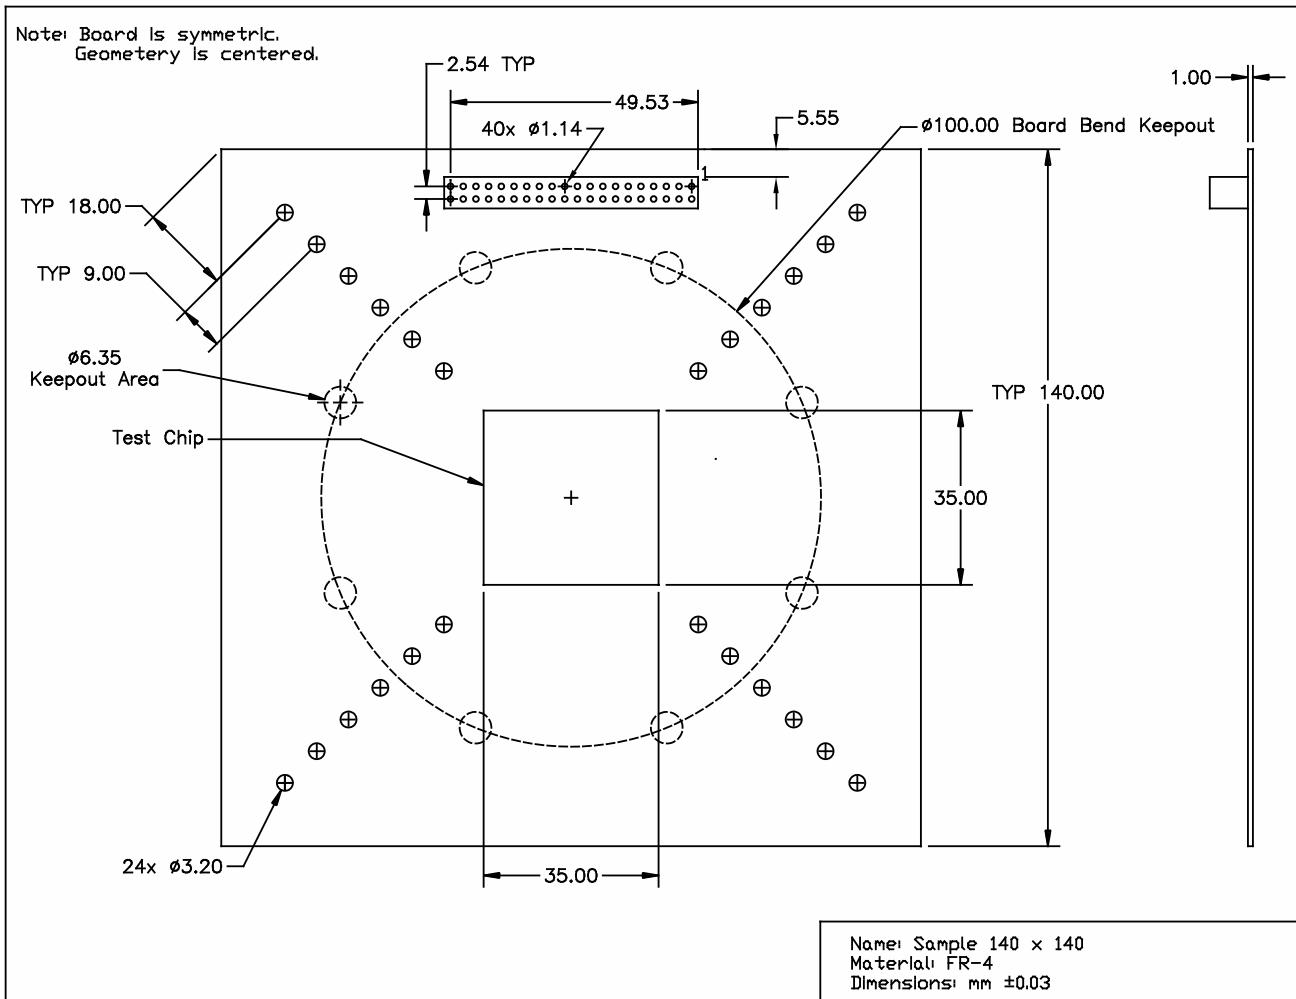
CAD Drawing for Test Board Design for BLRT (for Large IC Packages)
